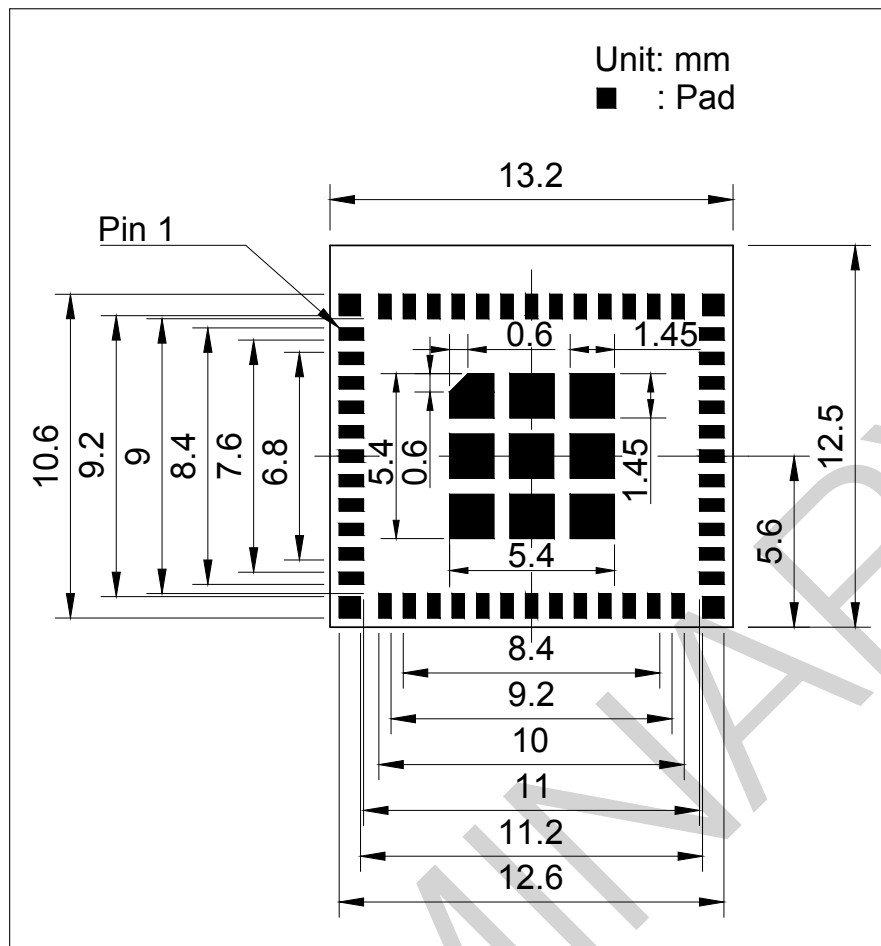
ESP8684-MINI-1U Recommended PCB Land Pattern
